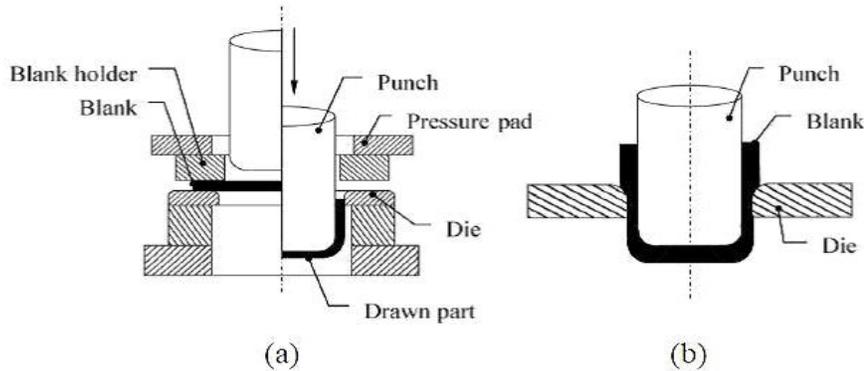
A schematic illustration of drawing process: (a) Pure Drawing; (b) Ironing.
